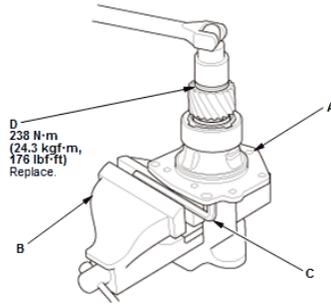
Transfer Hypoid Drive Gear/Shaft Assembly Locknut With Torque Specifications
